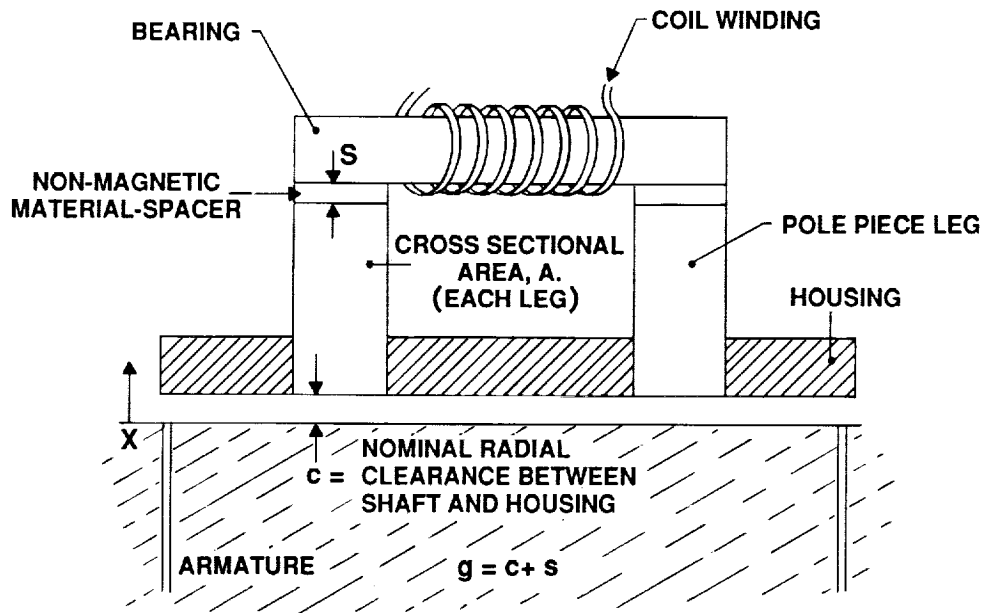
Detail of single bearing actuator geometry in bearing plane.
